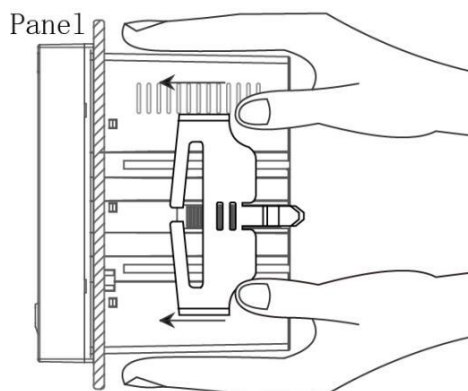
Fixed on the panel by the mounting blocks
